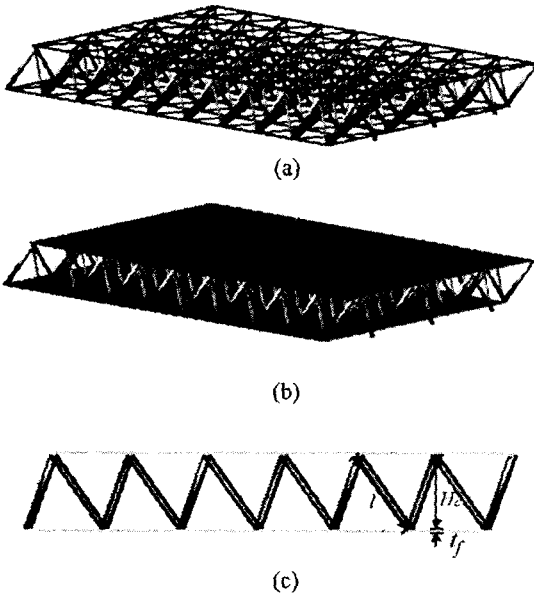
Sandwich panels with octet truss core fabricated from wires; a) meshed face sheet, b) blind face sheet, c) side view
